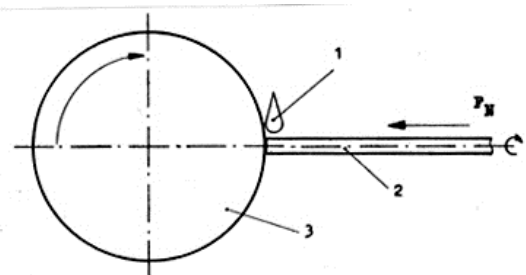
Principle assembly for brass deposition on shaft (1 - surface active liquid; 2 - brass rod; 3 - shaft to be coated)
